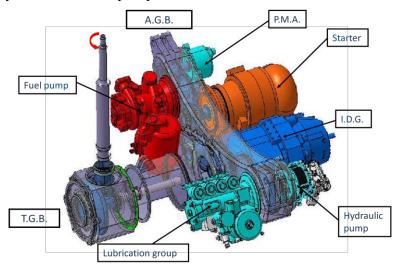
, Example of an accessory gearbox and its components for civil aviation application^{xiv} The accessory gearbox is connected to the high-pressure shaft through a series of gearbox (see Figure 10):
